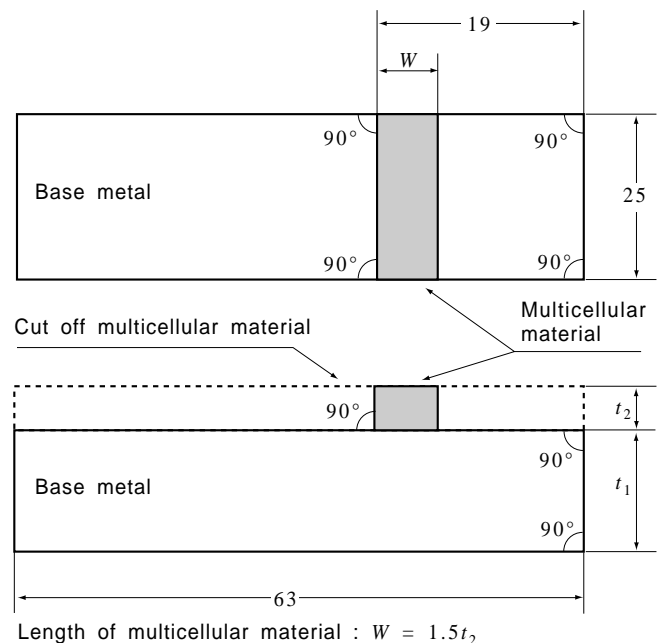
Size and Dimensions of Shearing Test Specimens (unit: mm)
